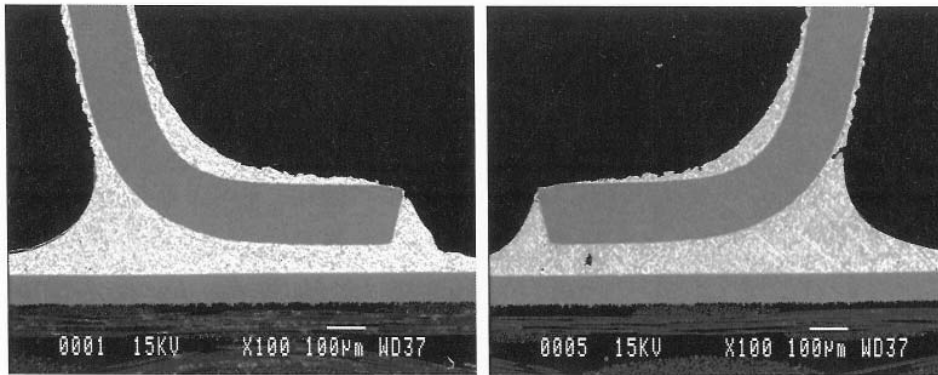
Microsections of centre solder joints on the board with EPO-TEK 930 as staking compound
